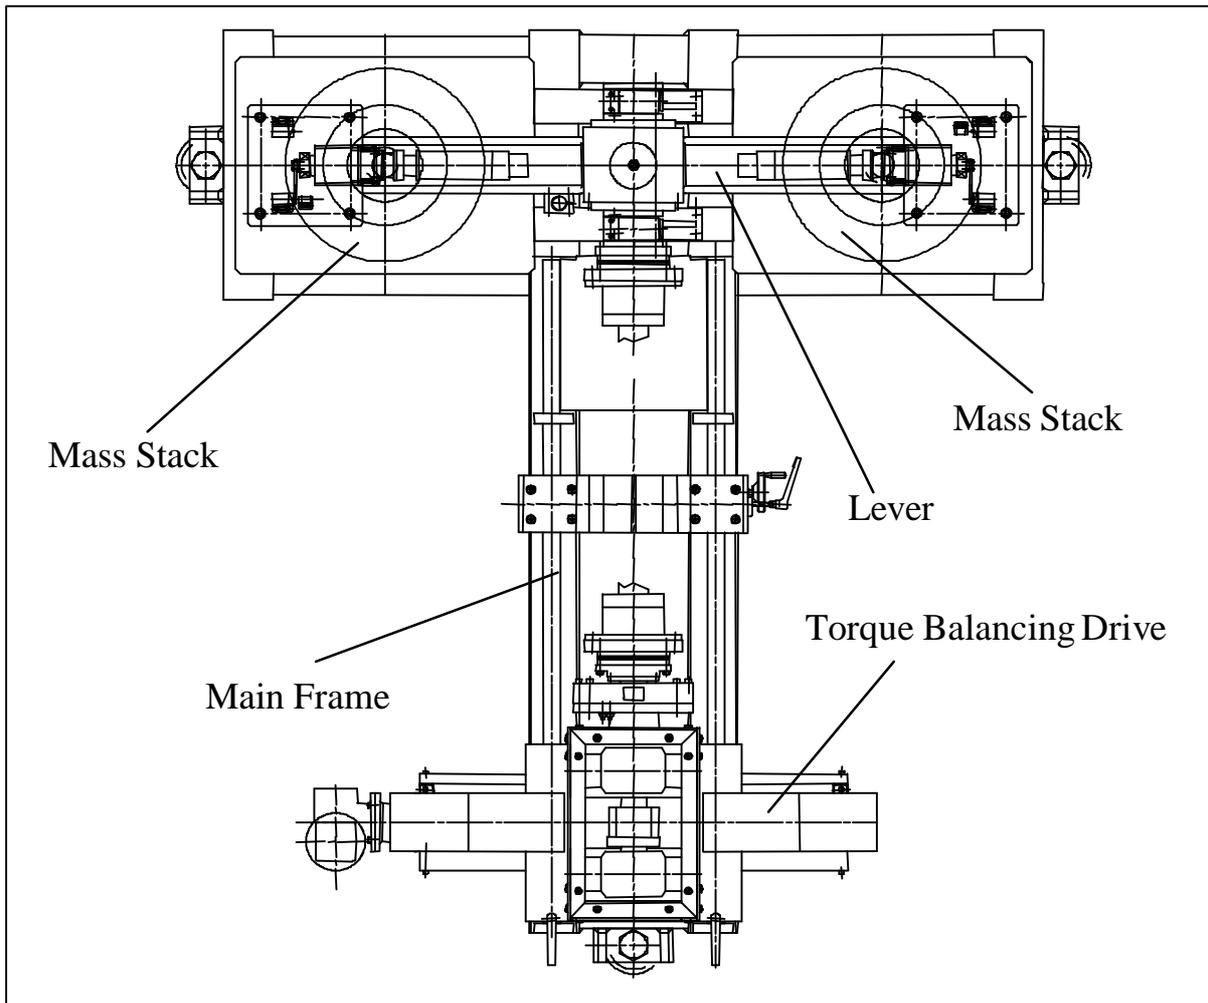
Top view of the 1 kNm Torque-Standard Machine
